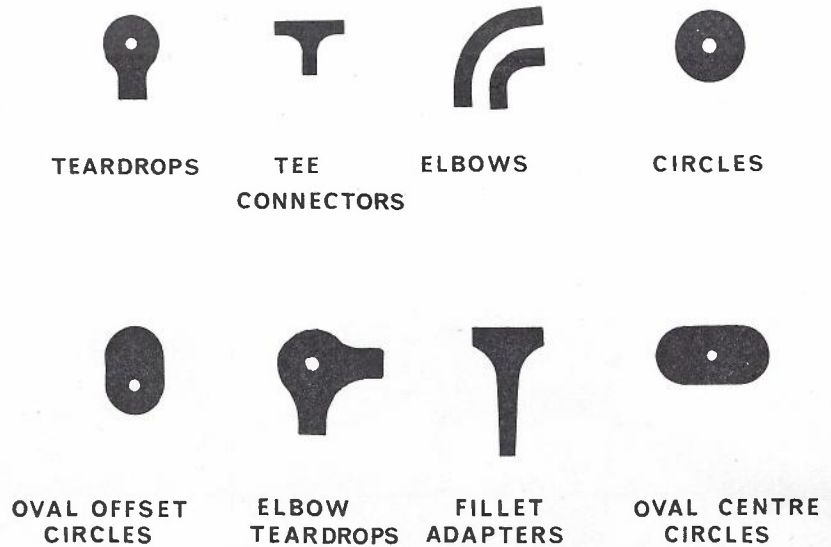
Self-Adhesive Die-Cut Shapes Available from Tape Manufacturers.
